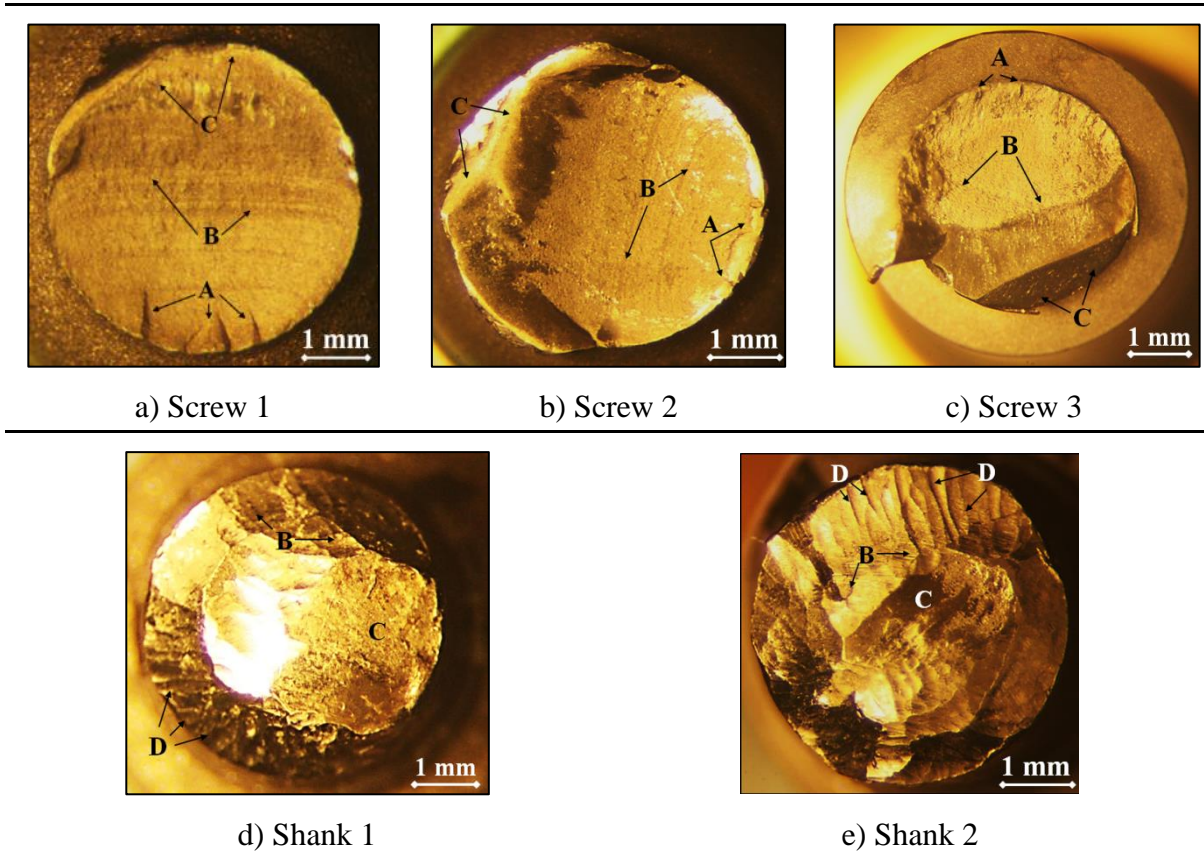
Stereo microscope images of BFus 2+ screws fracture surface. The letters in the photography indicate A - Initiation of the crack; B - Beach marks; C - Brittle failure; D - Fatigue crack propagation.
